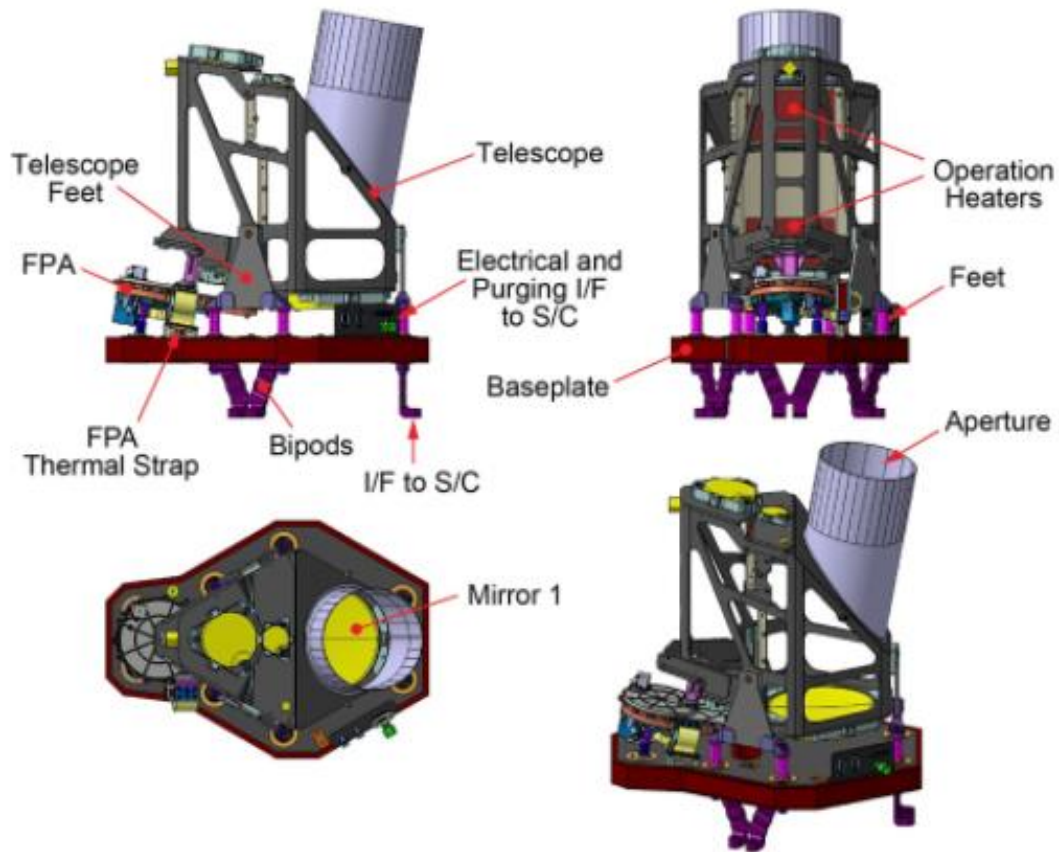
CoCa telescope with focal plane assembly and filter wheel
